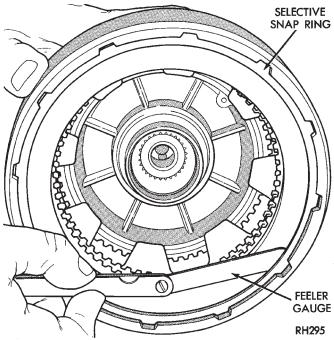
Typical Method Of Checking Rear Clutch Pack Clearance
